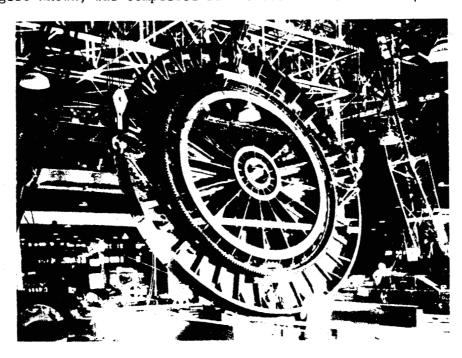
INSTALLATION OF 42-FOOT BORING MILL
